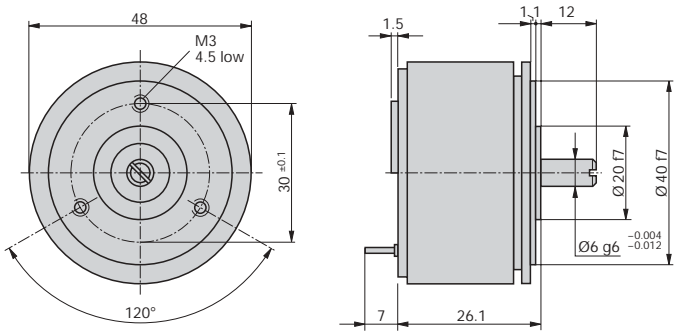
KINAX 2W2 with special drive shaft at front only, \varnothing 6 mm, length 12 mm.
